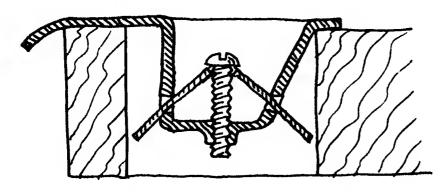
"Mr. Schlage's Sketches of Fastening Schemes" dated 11 Jan. & 14 Jan., 1963
